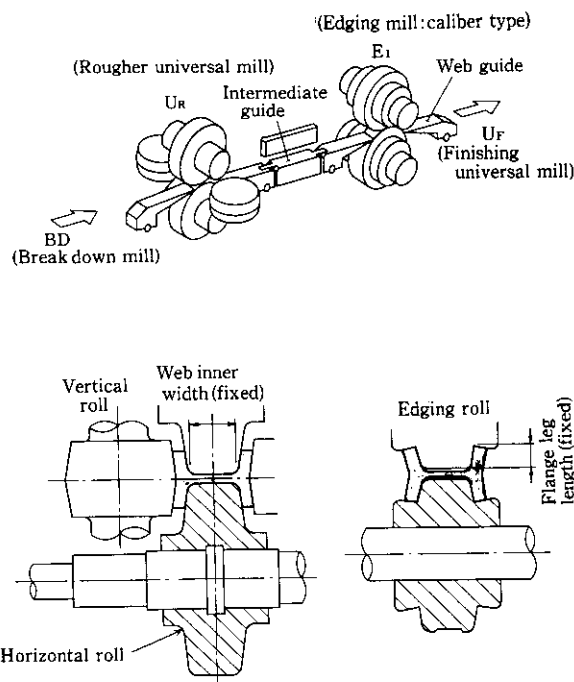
Conventional rolling method for H-shapes by universal and edging mill
